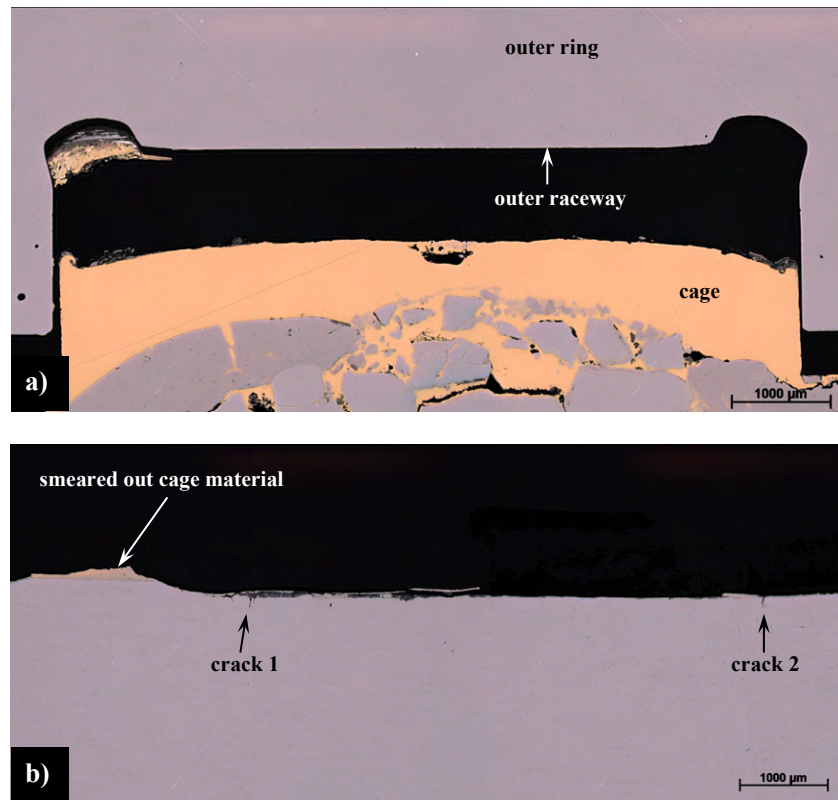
Optical microscopy image of the cross-sections of the bearing a) outer ring and b) inner ring
